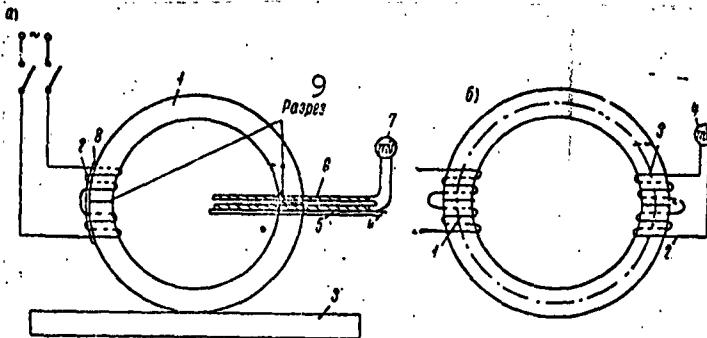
Device for examining the number of turns on the sections (a). Schematic diagram (b). 1) Iron core; 2) feed winding; 3) insulating base; 4) textolite lining; 5) standard section; 6) test section; 7) millivoltmeter; 8) rubber padding; 9) gap.
